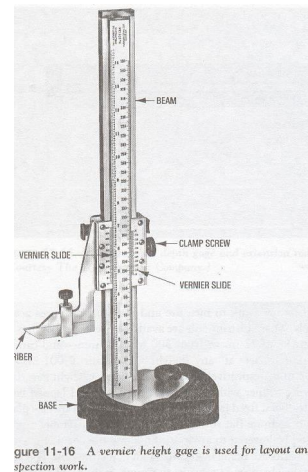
A vernier height gage is used for layout and inspection work.
